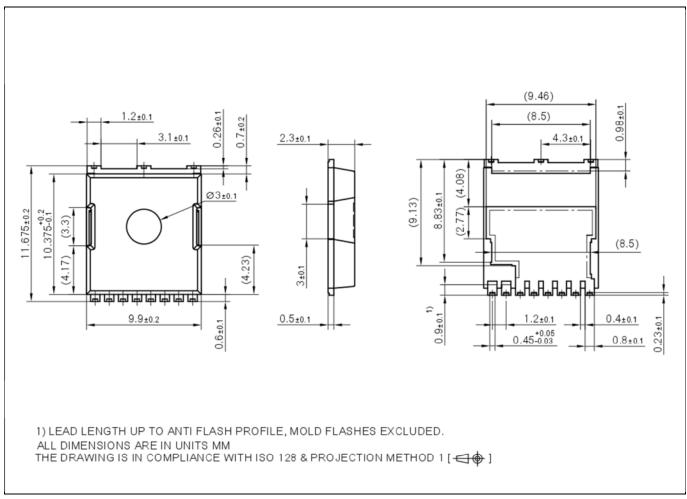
PG-HSOF-8-3 Package Outline, dimensions (mm)
